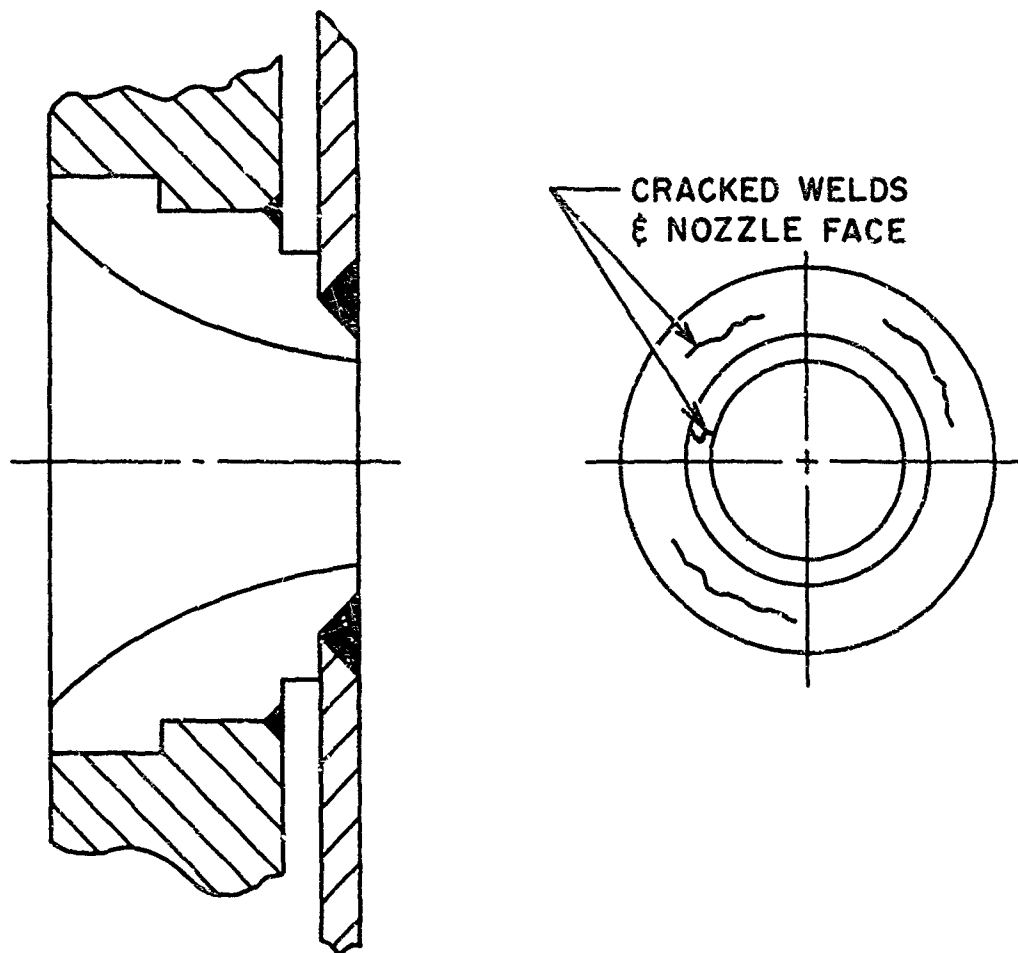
Oxygen Nozzle Showing Defective Welds
